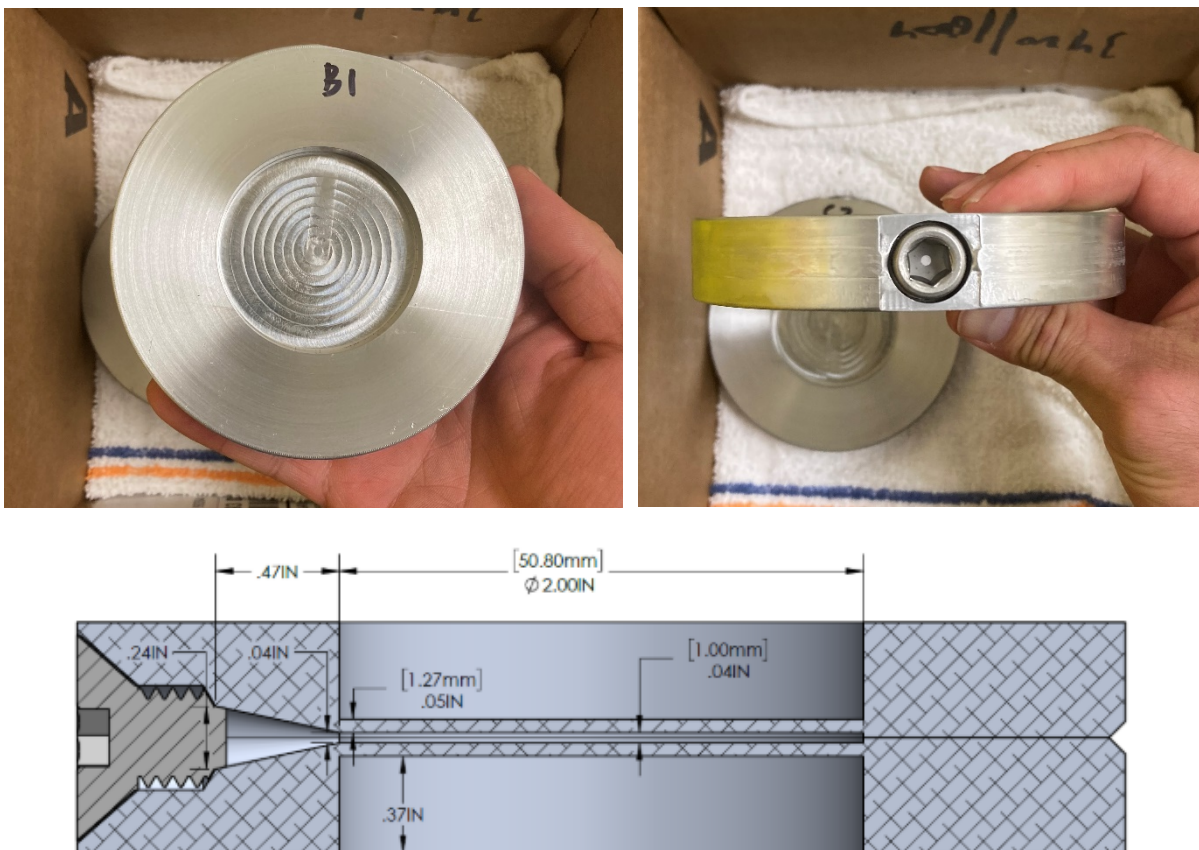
Photographs of a custom sample holder (top). Aluminum sample holder for ^{233}U powders (bottom). Two sides are welded together and a port at left allows filling holder. Note that the final design used a path length of 1.2 mm.
